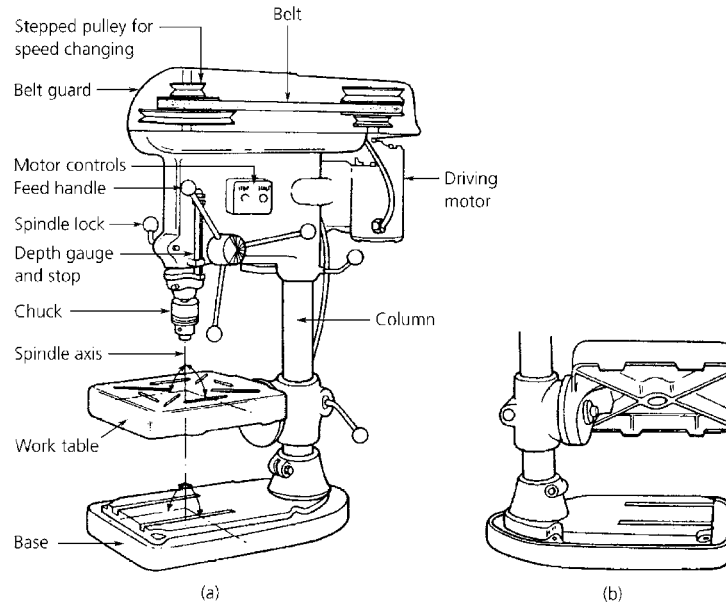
(a) Bench drilling machine; (b) table tilted
